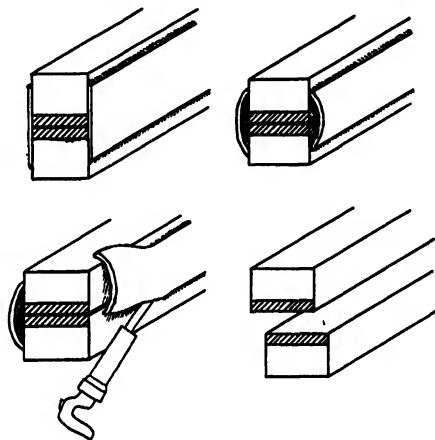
TWO-HIGH COMPOSITE ASSEMBLY.
